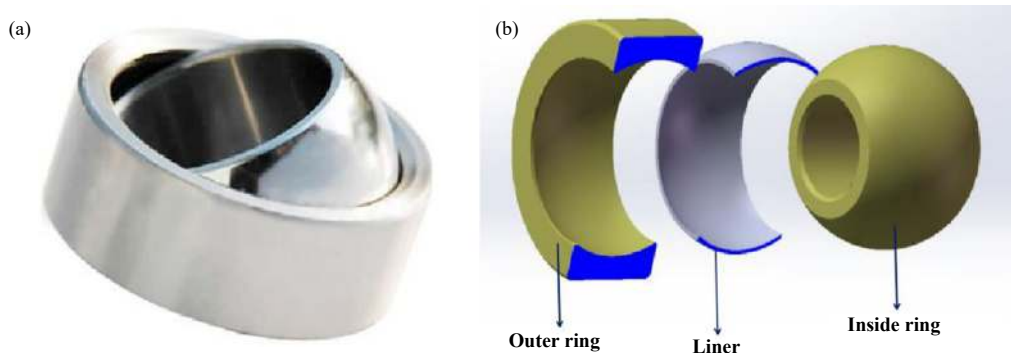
Physical drawing (a) and three-dimensional structure diagram (b) of self-lubricating joint bearings
